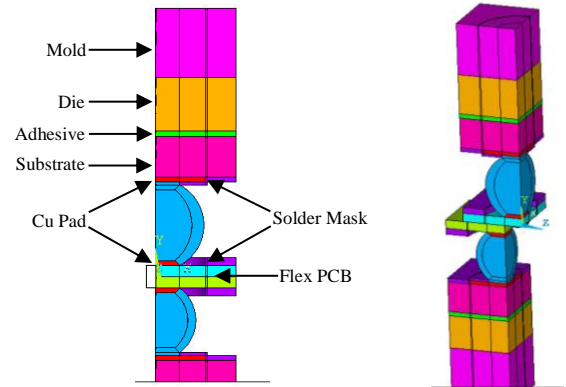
Quarter Model of Solder Joint on Flexible Assembly
